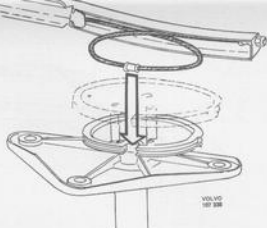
Installing cable for parallel drive link, right-hand side
